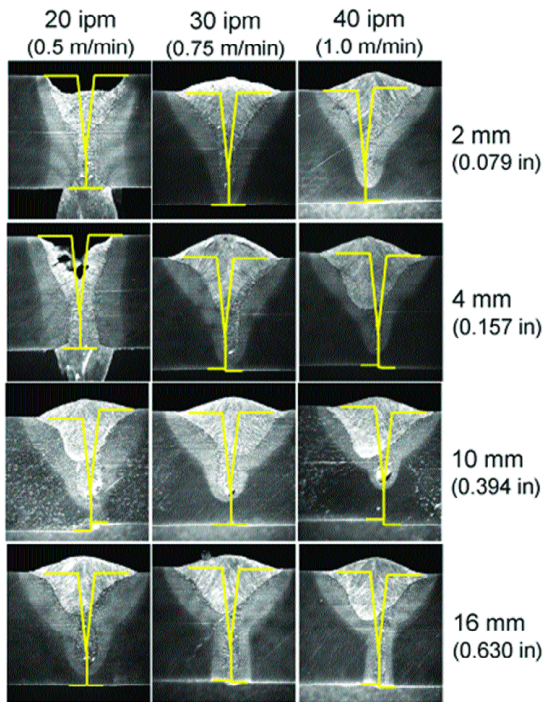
Macroscopic cross-sections illustrate effects of laser-to-GMAW head spacing and travel speed on fusion zone geometry.
